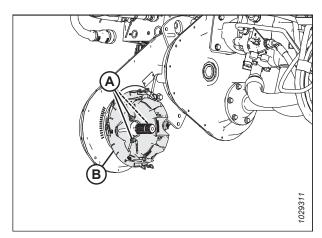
Completion Gearbox Chain Tensioner Cover
